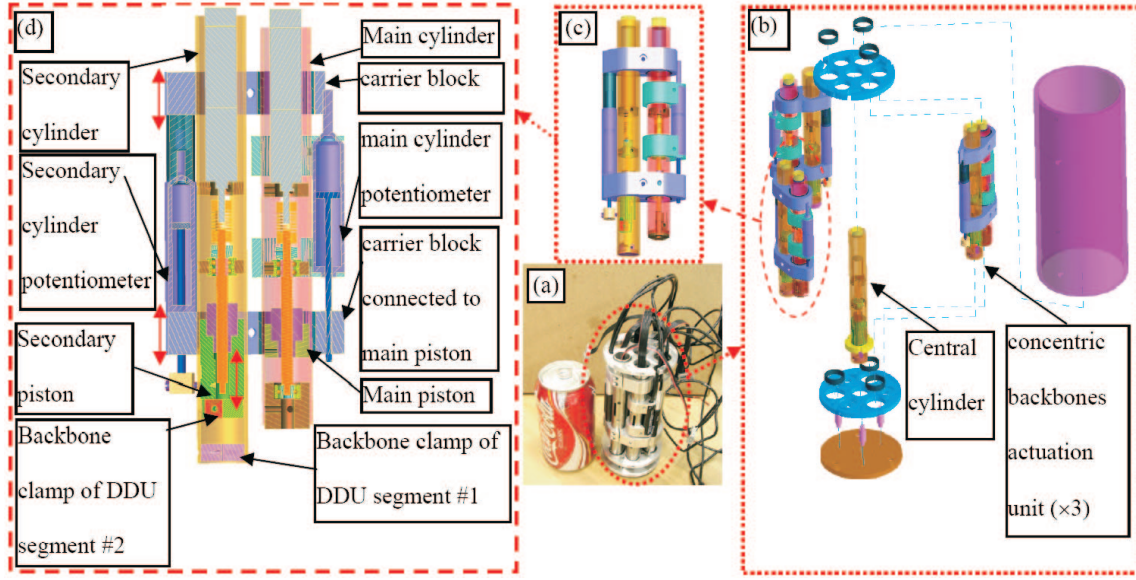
A seven-DoF actuation unit for a two-section snake-like DDU with a detachable gripper: (a) the assembled prototype; (b) an exploded view; (c) actuation unit for two coaxial backbones; (d) cross section of the two-DoF actuation unit of two coaxial backbones.
